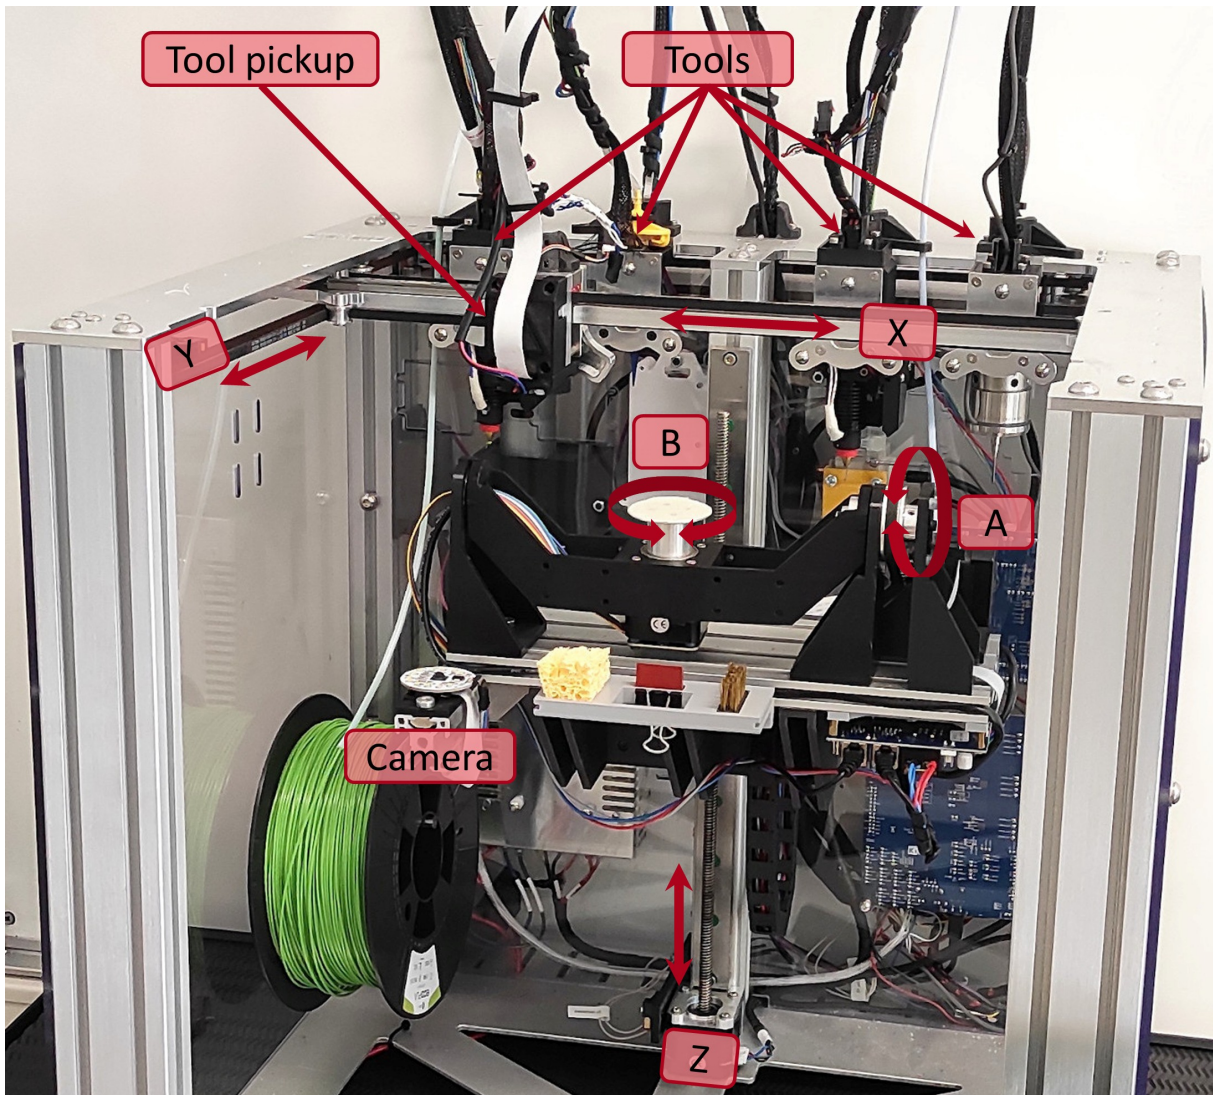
The modified five-axis E3D ToolChanger with the *A* and *B* axes mounted on the *Z* axis and the *X* and *Y* axis moving the tool pickup head. The four tools are parked at the back of the printer. The built in camera is used for tool calibration.
